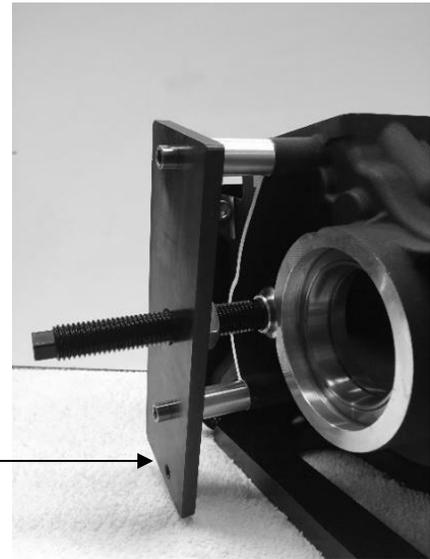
| SUPPORT PLATE POSITION FOR COUNTERSHAFT BEARING REMOVAL AND INSTALLATION
